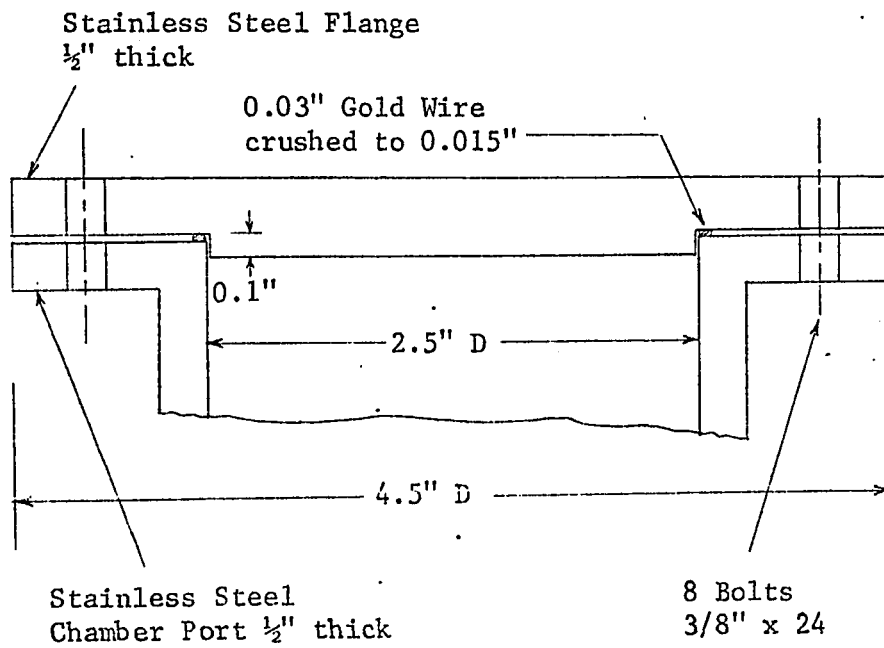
A Typical Gold Wire Vacuum Seal
